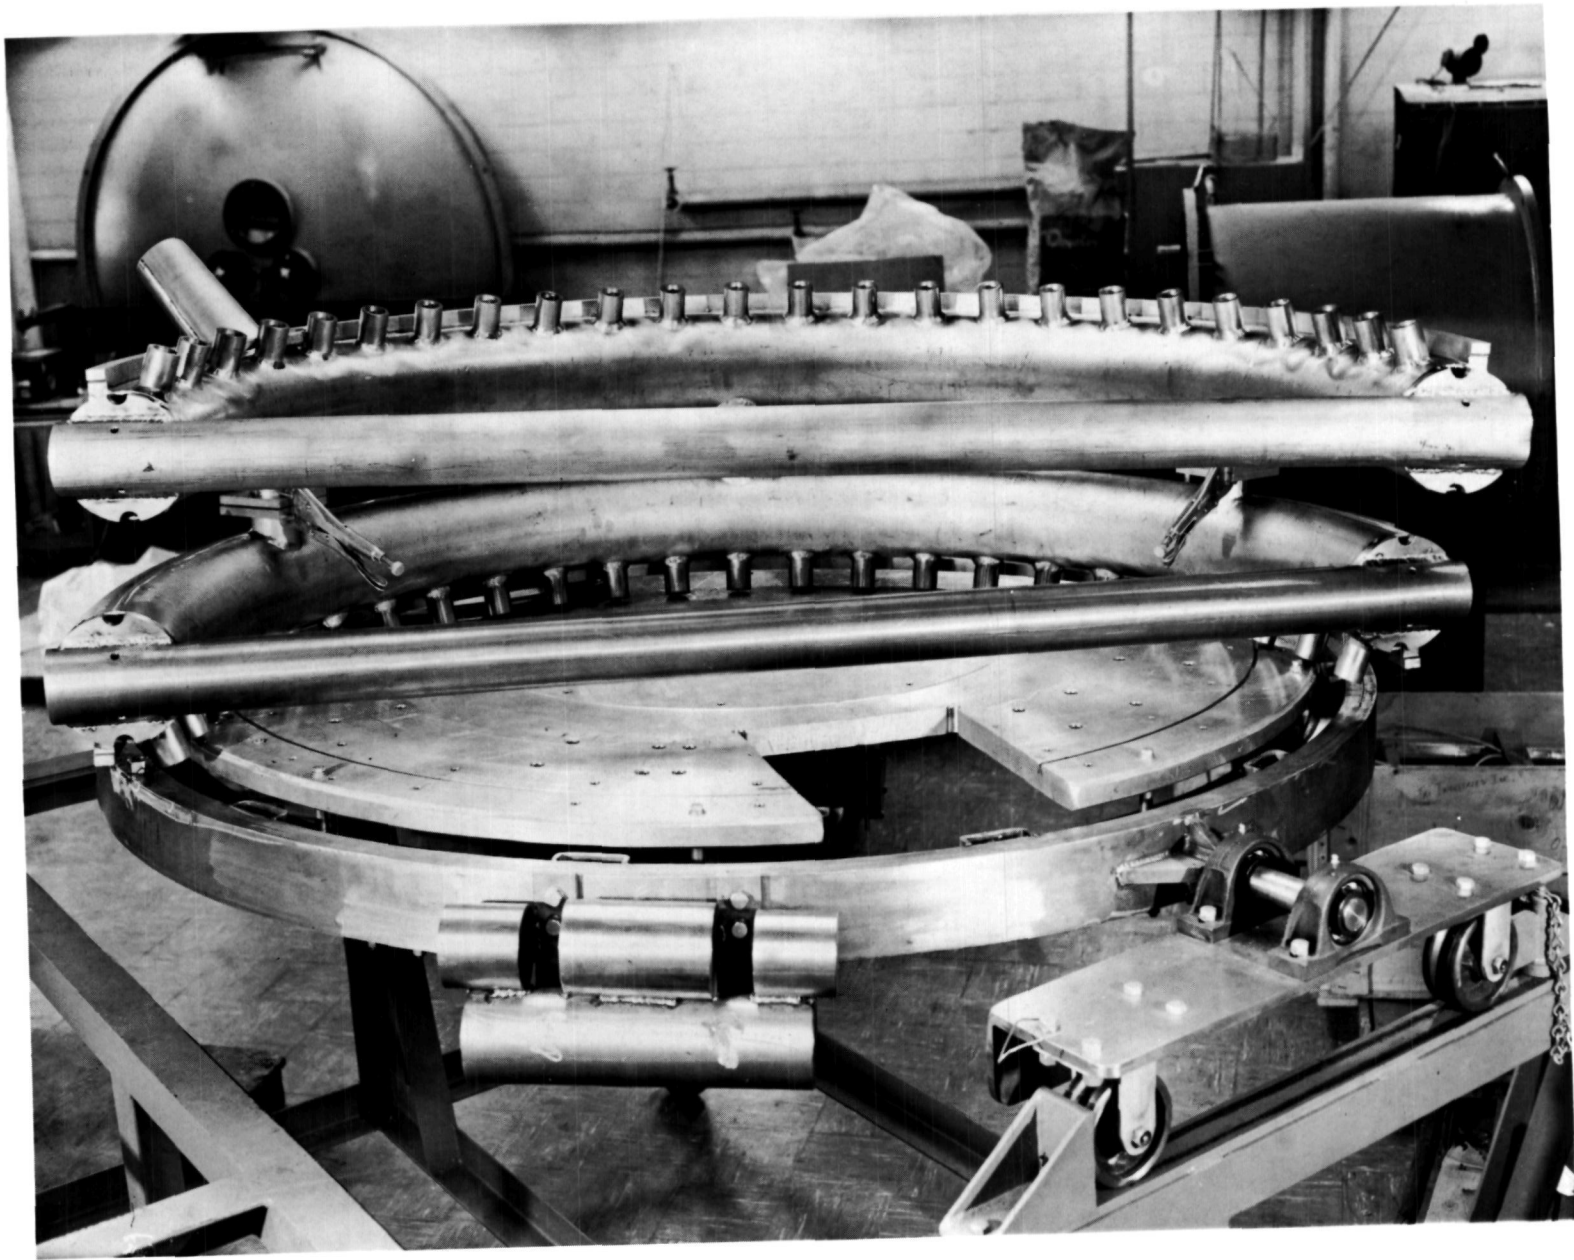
Inlet Manifold - Restraining Tie Bars Tack Welded to Halves for Post Weld Anneal.
